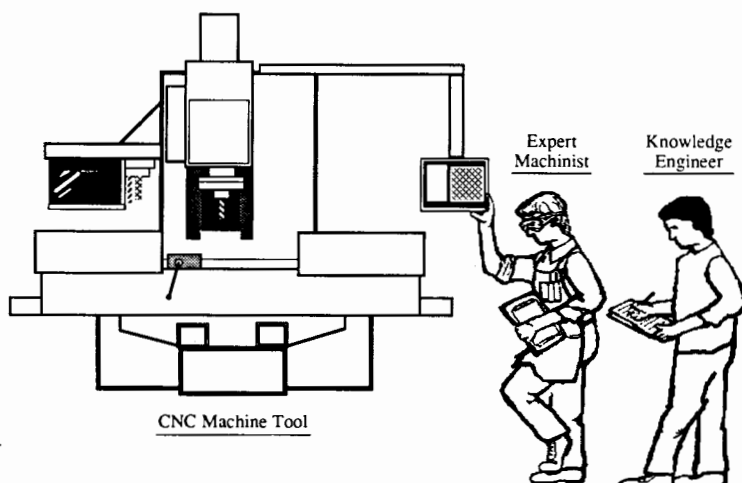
Knowledge engineer observing machinist's planning actions at the machine tool.
